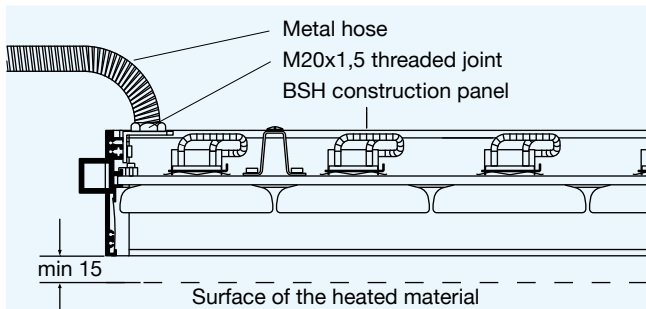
Arrangement of the connection unit for establishing the mains connection. Dimensions in mm
